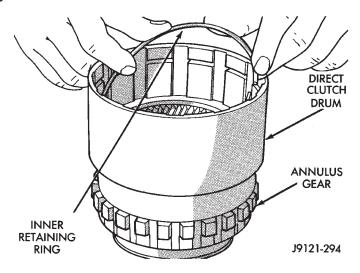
Installing Clutch Drum Inner Retaining Ring
